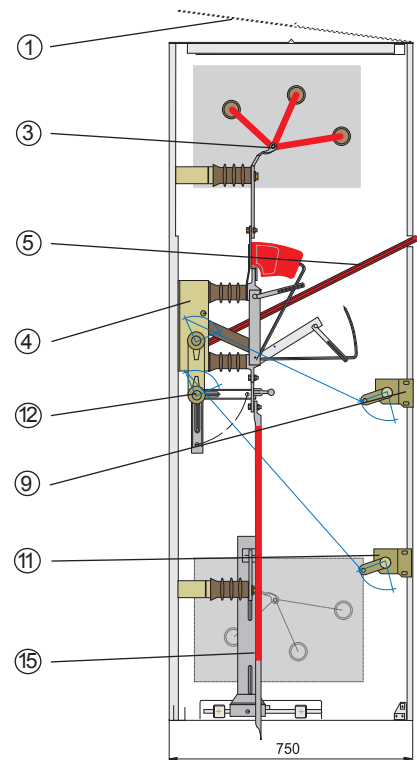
12 kV Cable panel (bus sectionalizer panel) with switch-disconnector H 22 EK/EA
